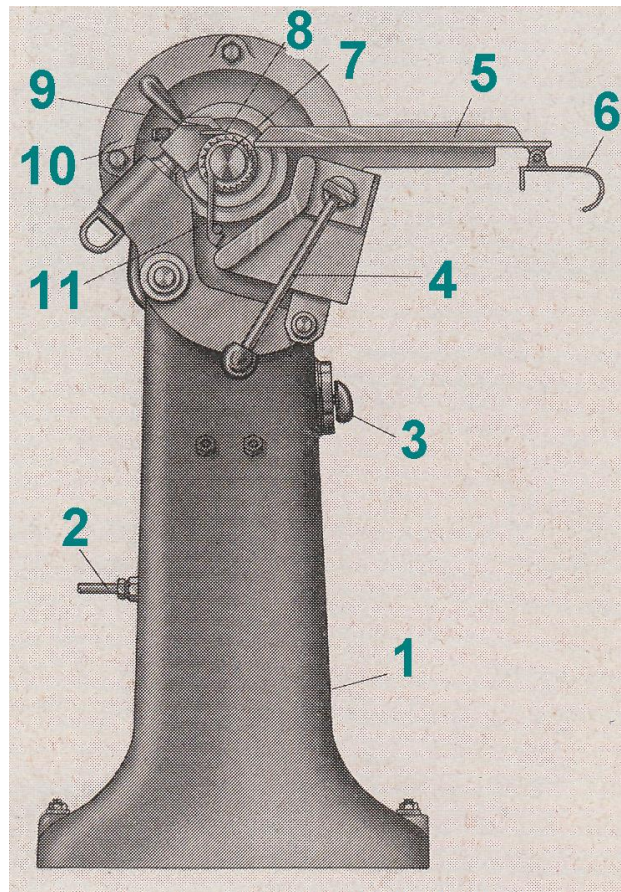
Machine for separating skin: 1) frame; 2) power supply; 3) switch; 4) lever with tension device; 5) table; 6) blocker; 7) drive gear shaft; 8) a knife for separating the skin; 9) knife holder; 10) adjusting screw; 11) skin guide [3, 4]
